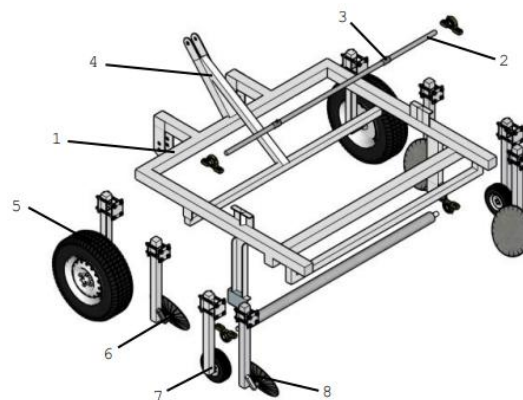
Exploded View of the Plastic Mulch-Laying Implement
